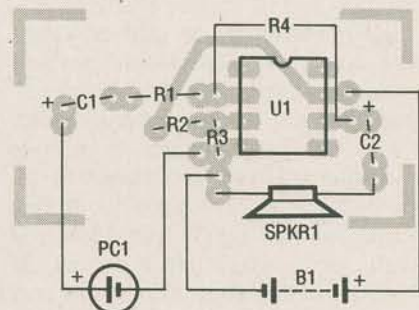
Be careful when assembling the receiver circuit; some solar cells are extremely fragile, and are easily damaged by heat and other stress.
